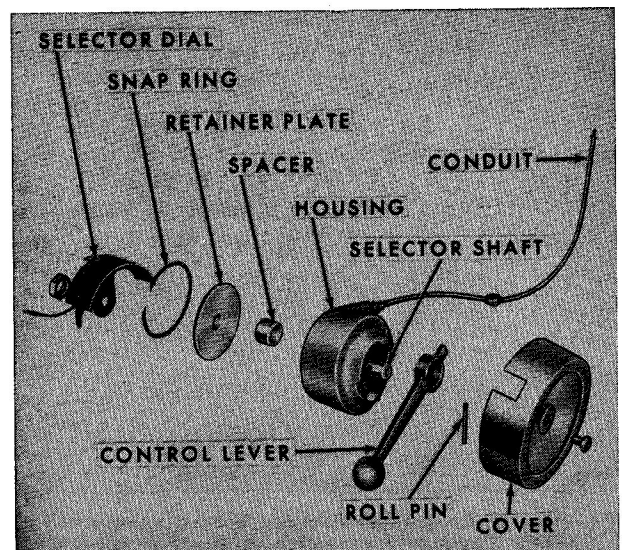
Exploded view showing component parts of speed selector assembly.
